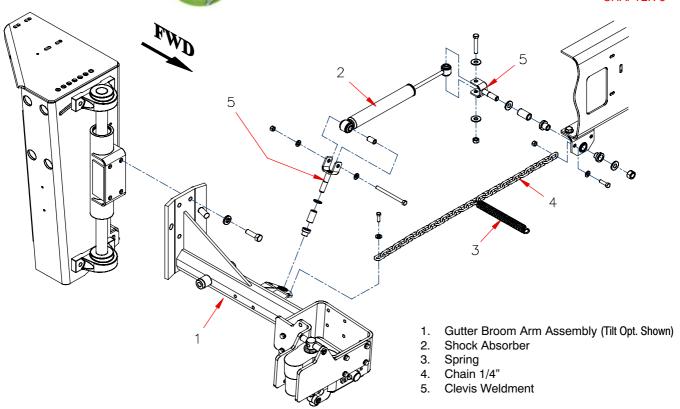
A The gutter broom arm shock absorber mounts to the gutter broom arm and to the frame. A jack may be required when working on the gutter broom arm assembly to relieve the hydraulic cylinder tension.
